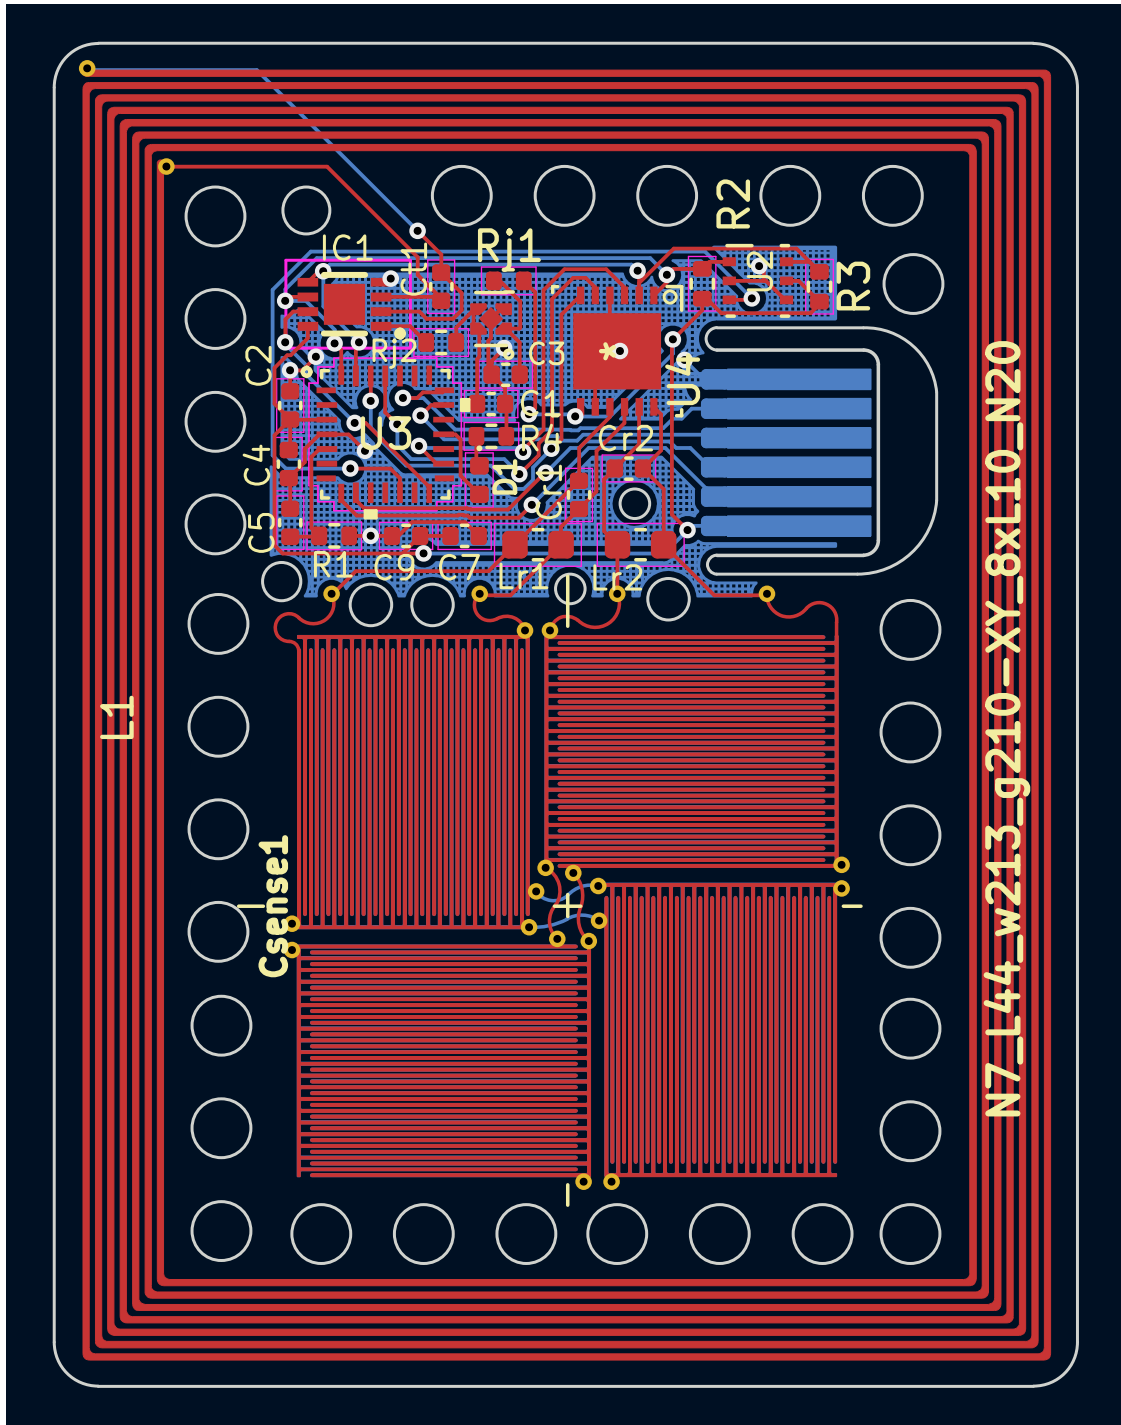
PCB Layout for capacitive sensor tag, designed in kiCad, [127].
